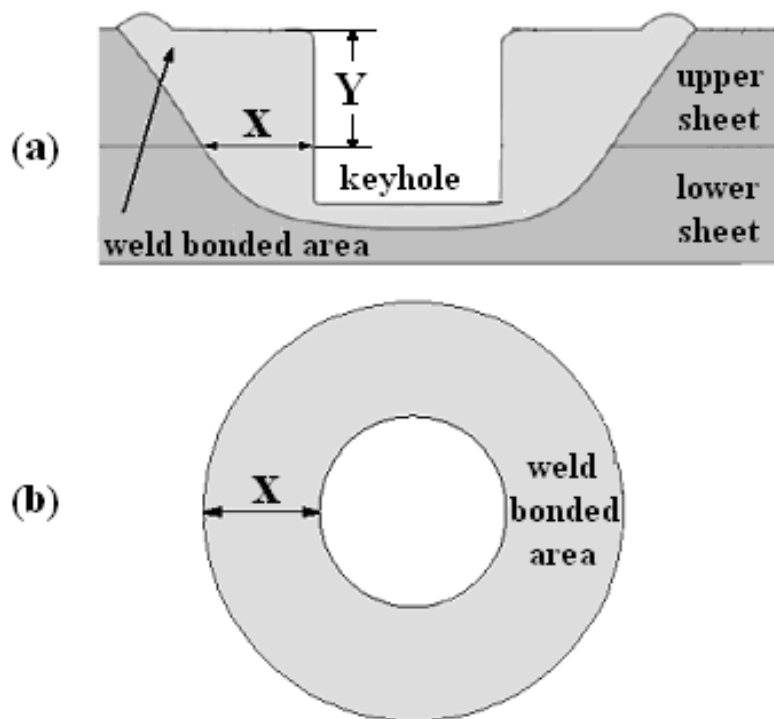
(a), Schematic illustration of the cross section of a friction stir spot weld; (b), geometry of the weld bond area (Gerlich et al., 2007); X, nugget thickness; Y, the thickness of the upper sheet.
